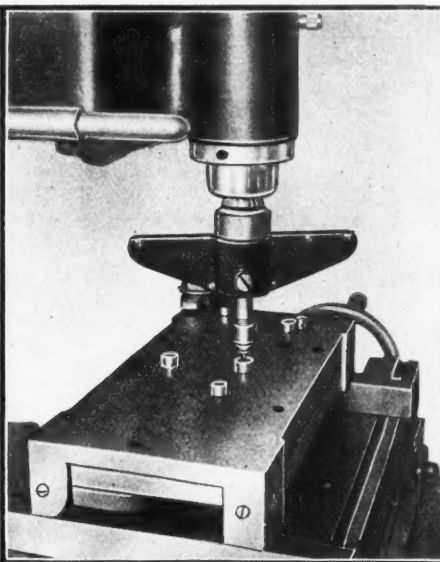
Indicating the Concentricity of a Jig Button with the Spindle.
